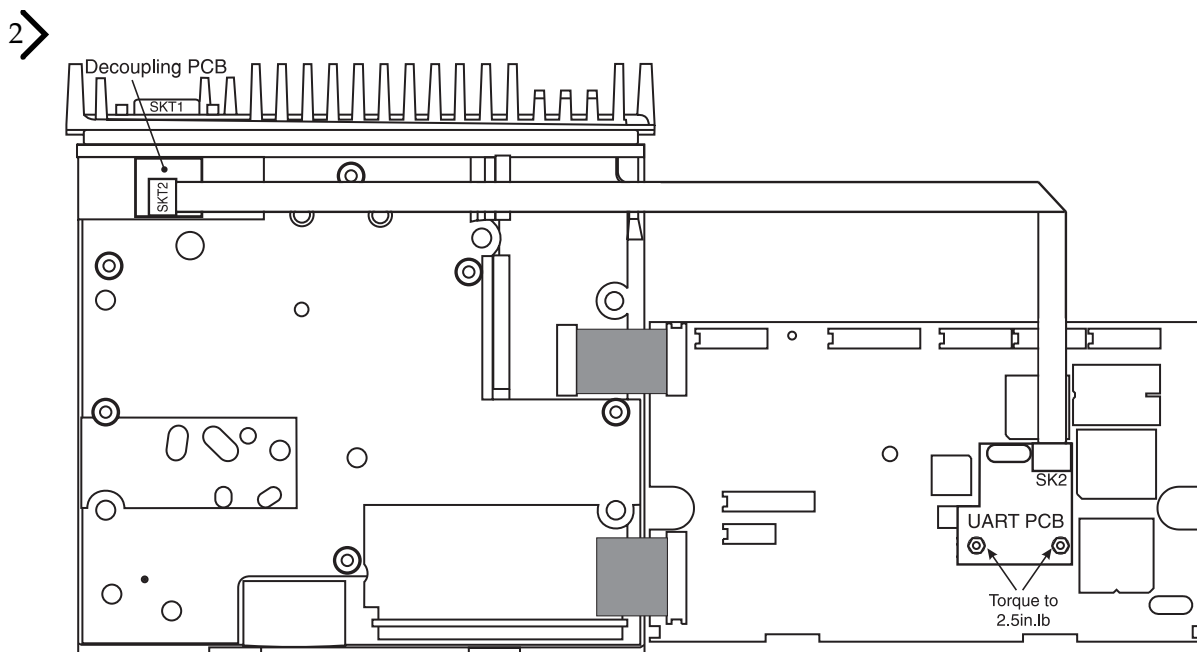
T2000-A66 Single Port UART PCB Mounting
